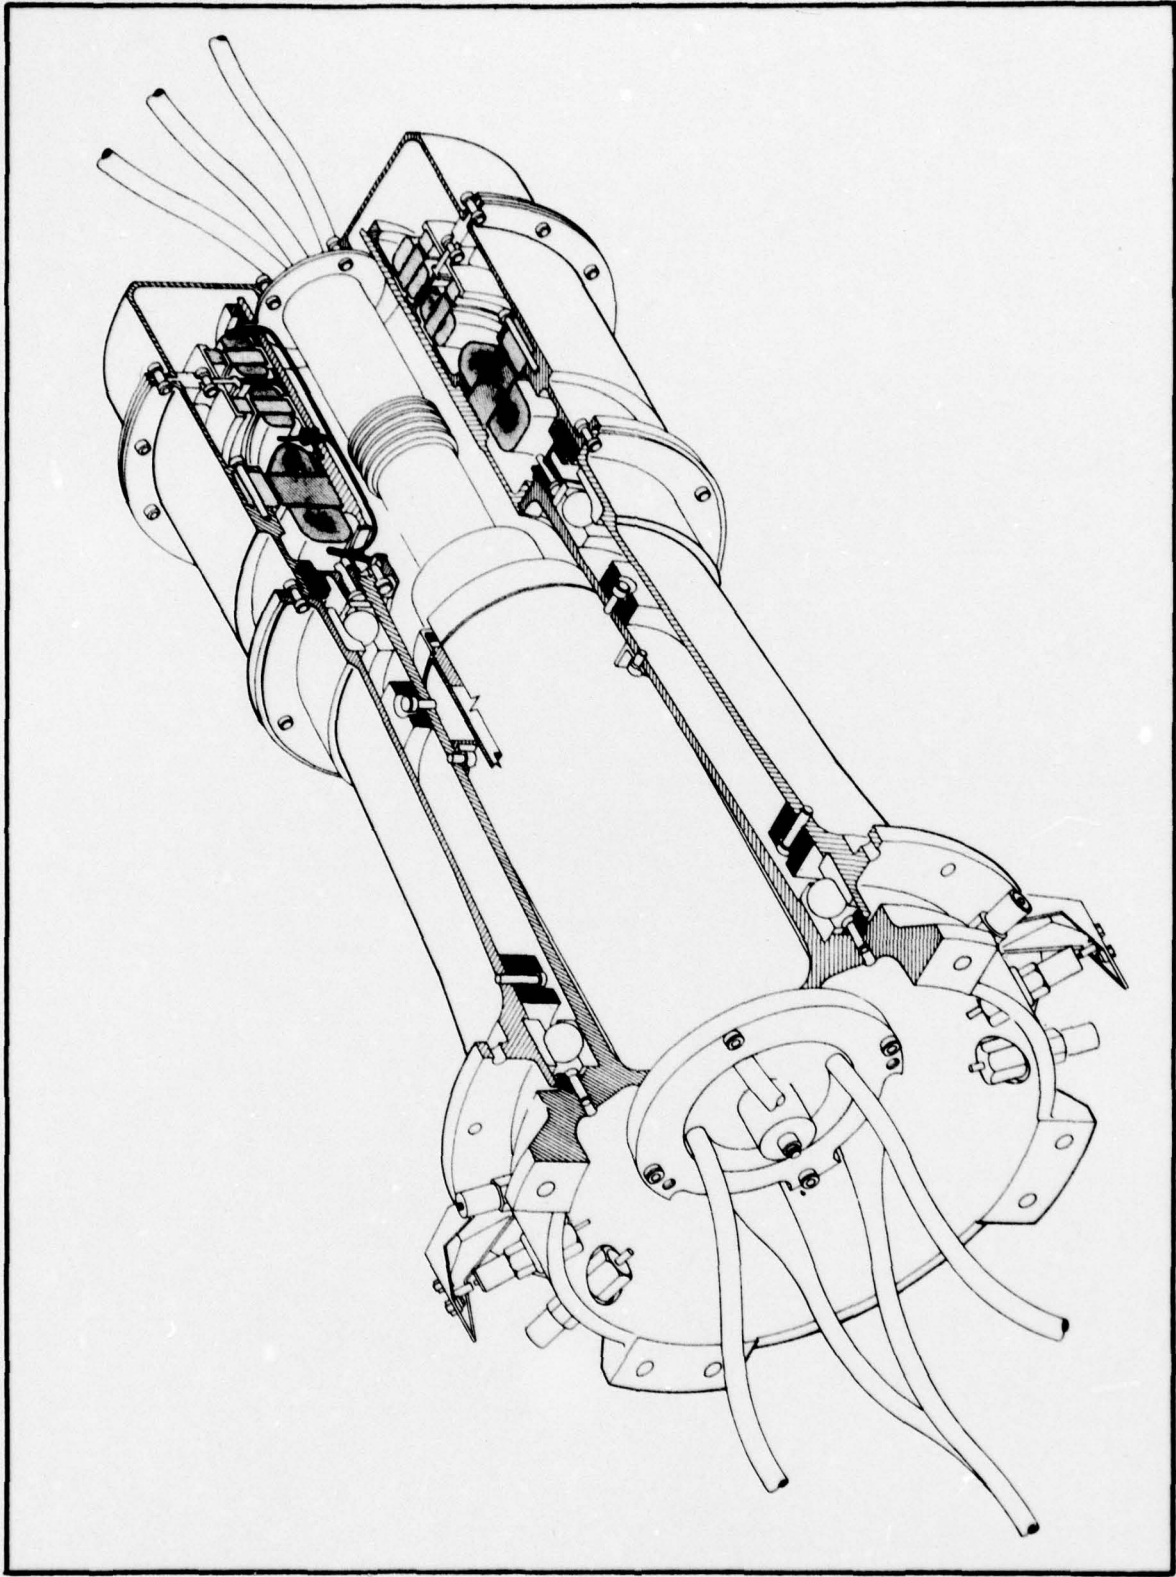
DSCS-II Despin Mechanical Assembly (Flights 1-6)
